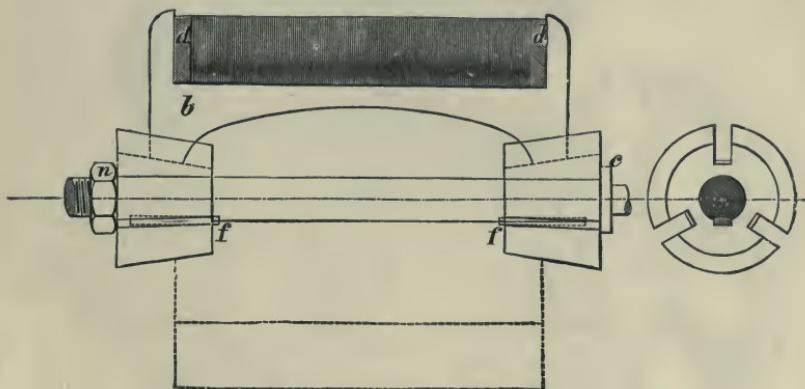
Mechanical Connection of Core Discs to Shaft of the Immisch Motor
